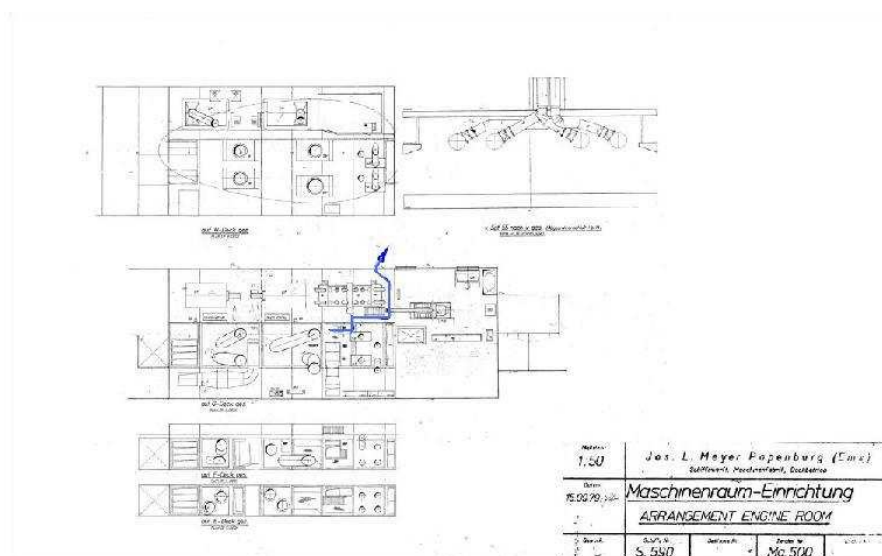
Extracts from the Jos. L. Meyer drawing No. MA500 showing also the upper parts of the egress route out of the ECR in detail
